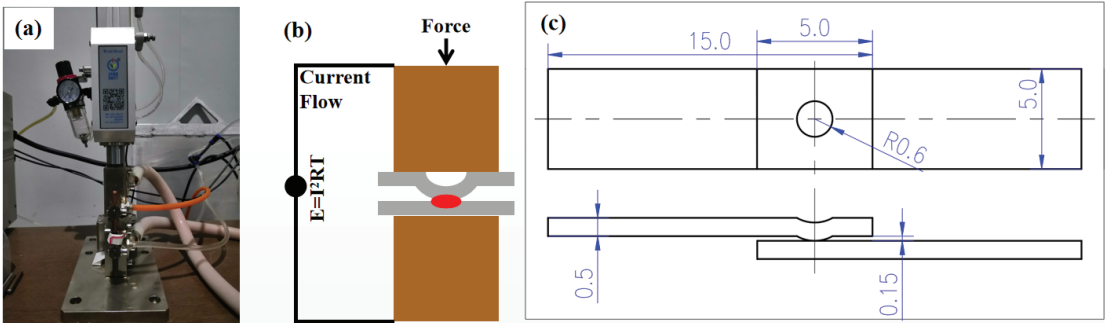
(a) Experimental equipment; schematic figures of (b) the projection weld illustration and (c) a welded specimen (all dimensions in mm).
